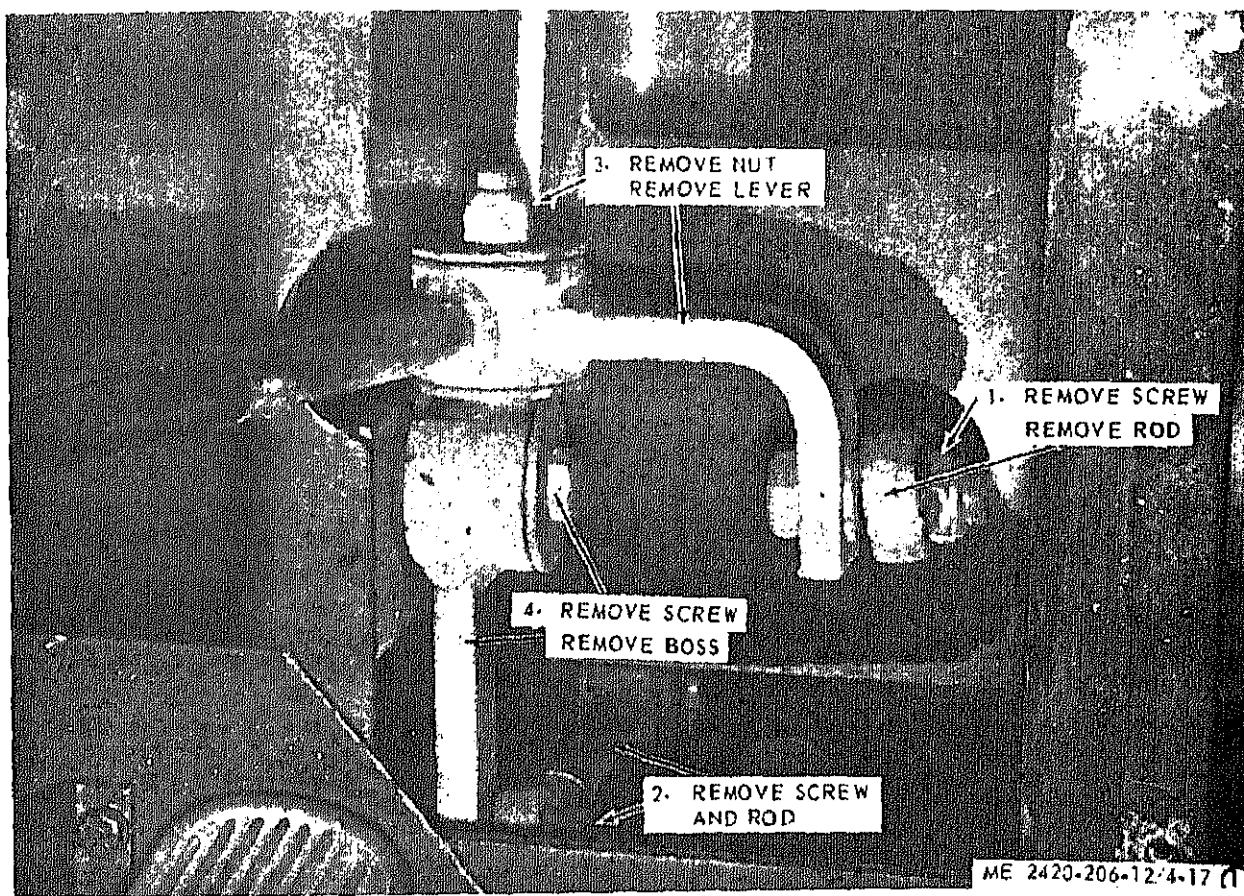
Bulldozer control lever, removal, disassembly, reassembly and installation (sheet 1 of 2).
